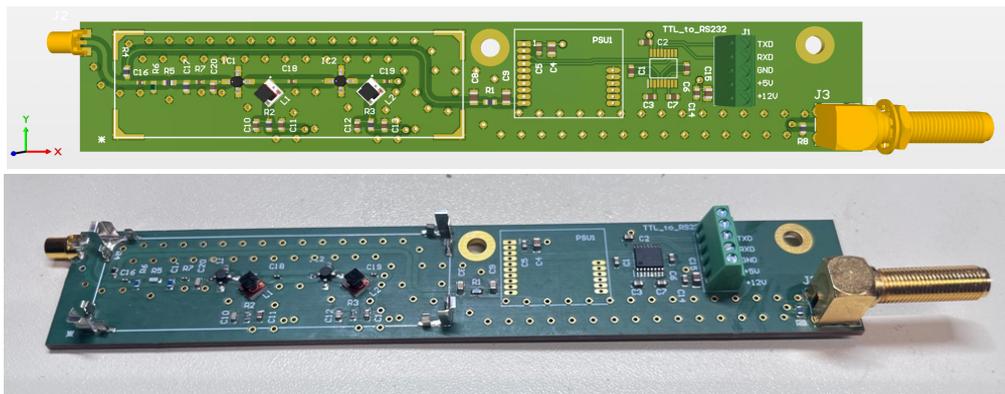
(a) Soldering schematic of the amplifier board. (b) Completed amplifier board after soldering.
